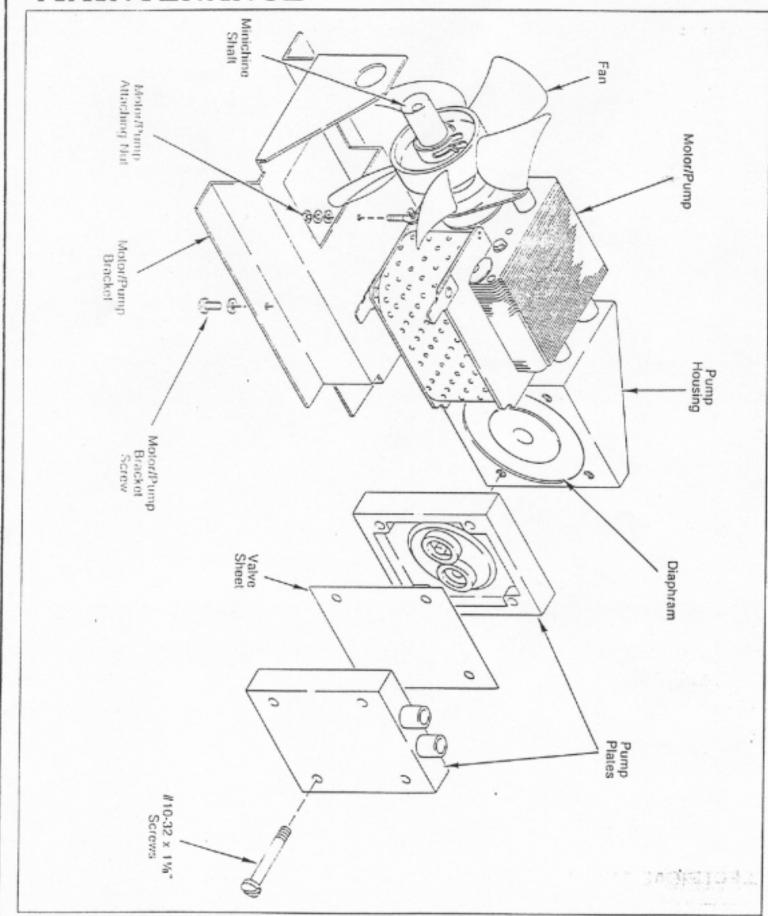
REMOVAL/REPLACEMENT AND CLEANING OF MOTOR/PUMP ASSEMBLY
